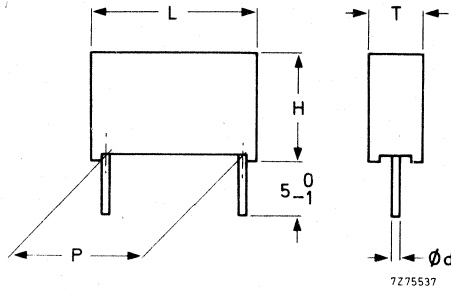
For dimensions T, L, H, P and d, see tables below.
